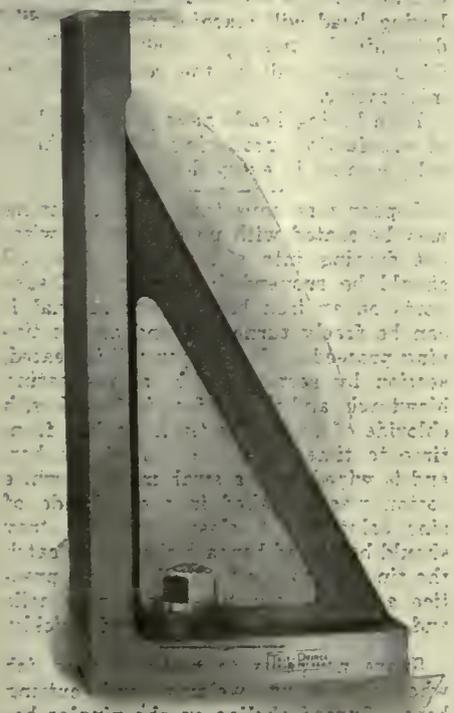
A DETAIL VIEW OF ONE STYLE OF MEASURING IRON.
